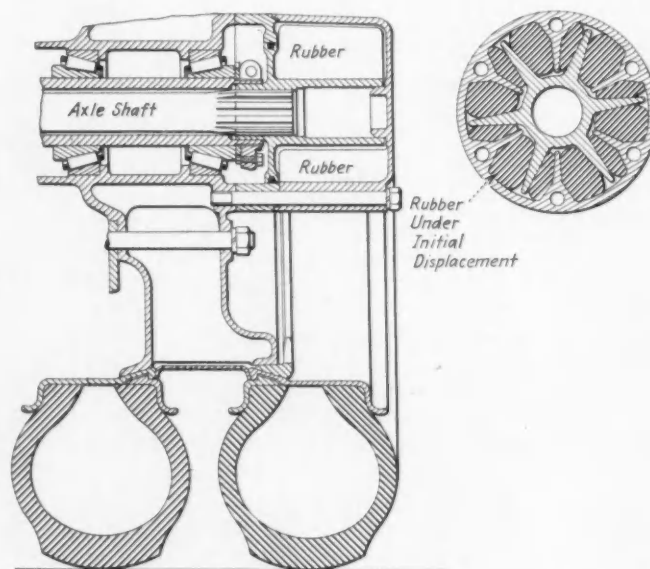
TORQUE INSULATOR FOR ATTACHMENT TO REAR WHEELS
